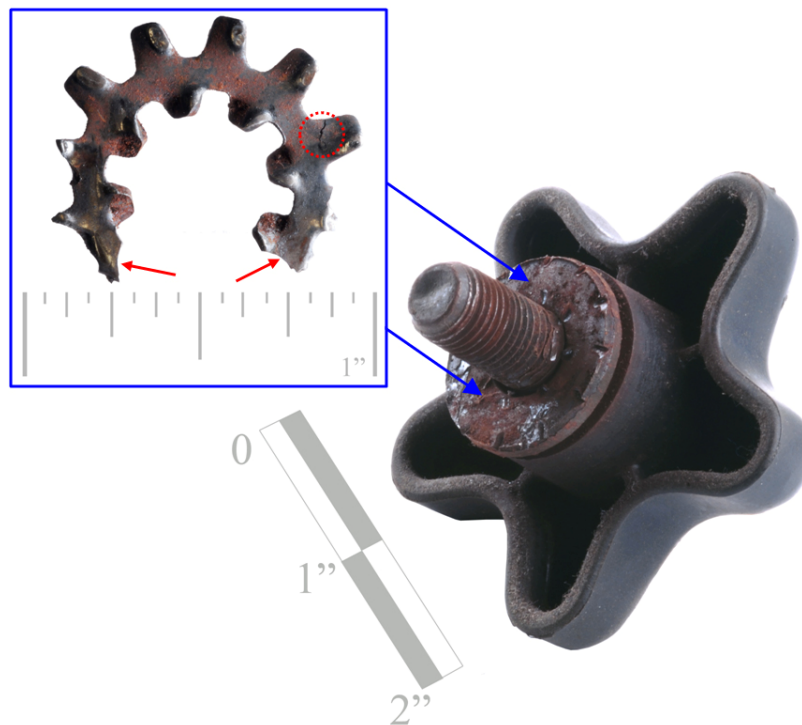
Photograph of the internal-external tooth lock washer that was observed to be fractured (arrows and circle) after removal of the chair back tightening knob (right). Scales are in inches.
